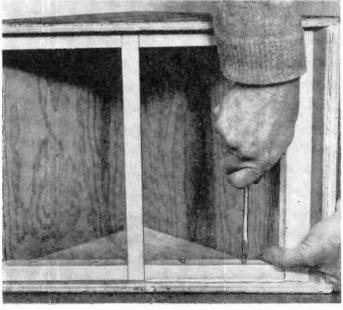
Fasten loudspeakers to speaker mounting board with #8 x 1/2" pan-head sheet metal screws.
